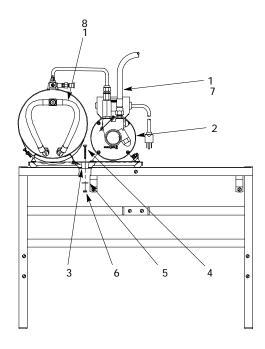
PUMP AND MOTOR ASSEMBLY
